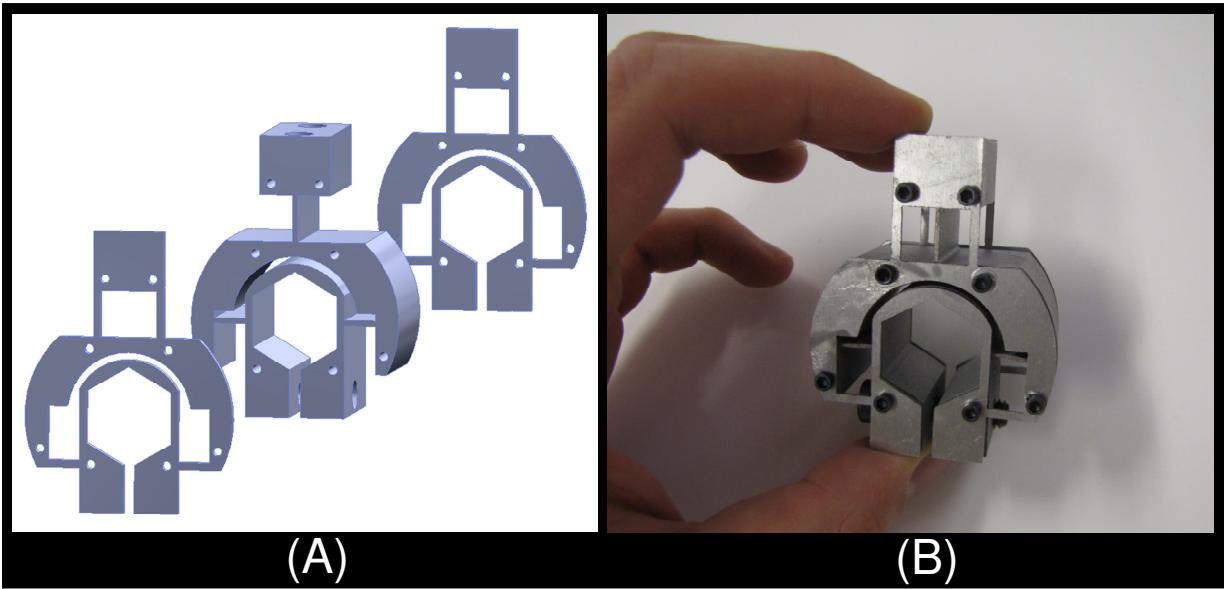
The flexure consists of three planar pieces (A). The final lead screw flexure (B)
